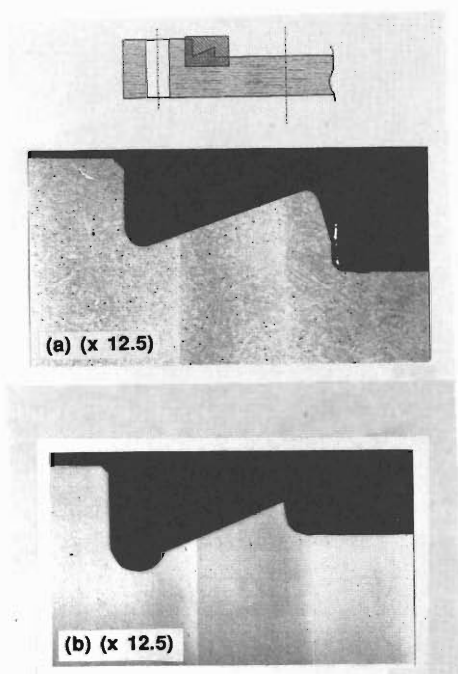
Photographs of knife edge of aluminum-alloy flanges. (a) at type A flange (× 12.5); (b) at type B flange (× 25).
